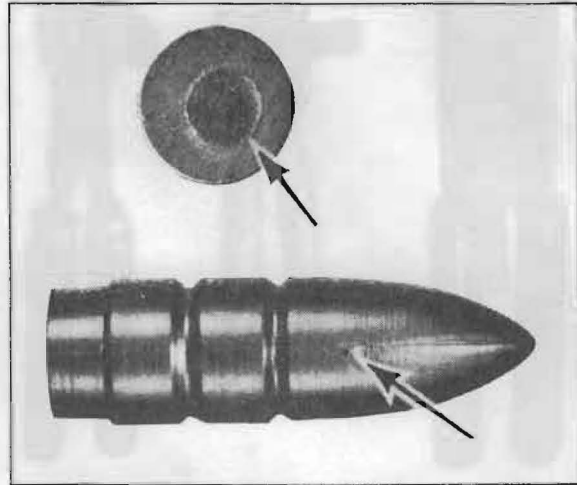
Some molds cast sprues slightly off-center (top). By marking the bullet relative to the sprue position, and loading the gun with the bullet mark always in the same position, such bullets will have the same (approximate) center of impact.
